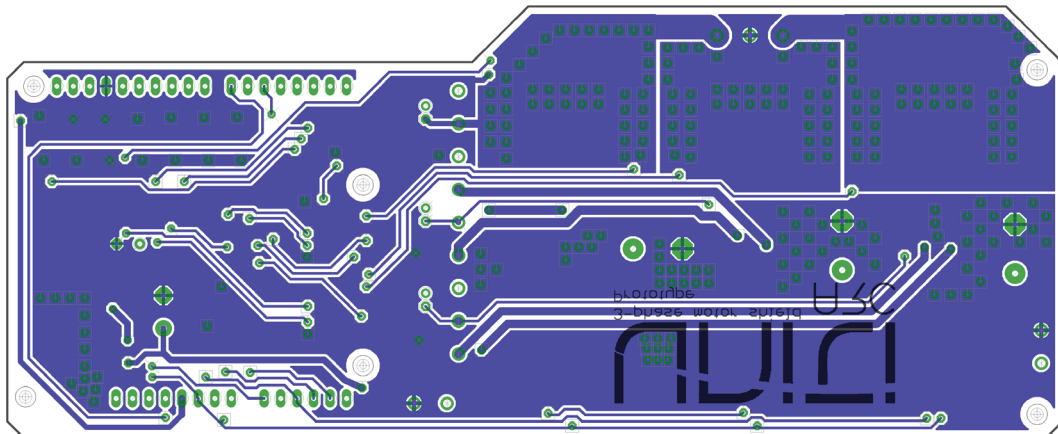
Top layer layout of Uniti ARC Motor Shield
